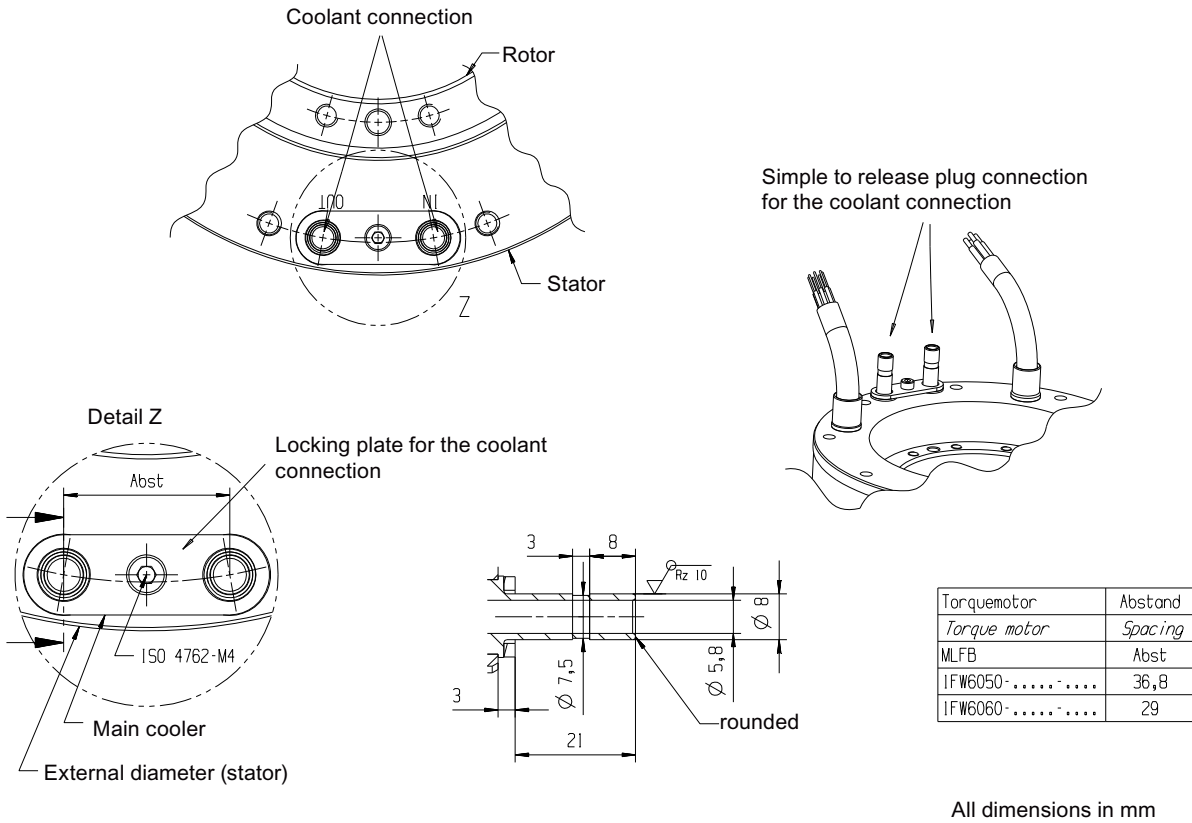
Axial cooler connection with sleeve for 1FW6050 and 1FW6060
